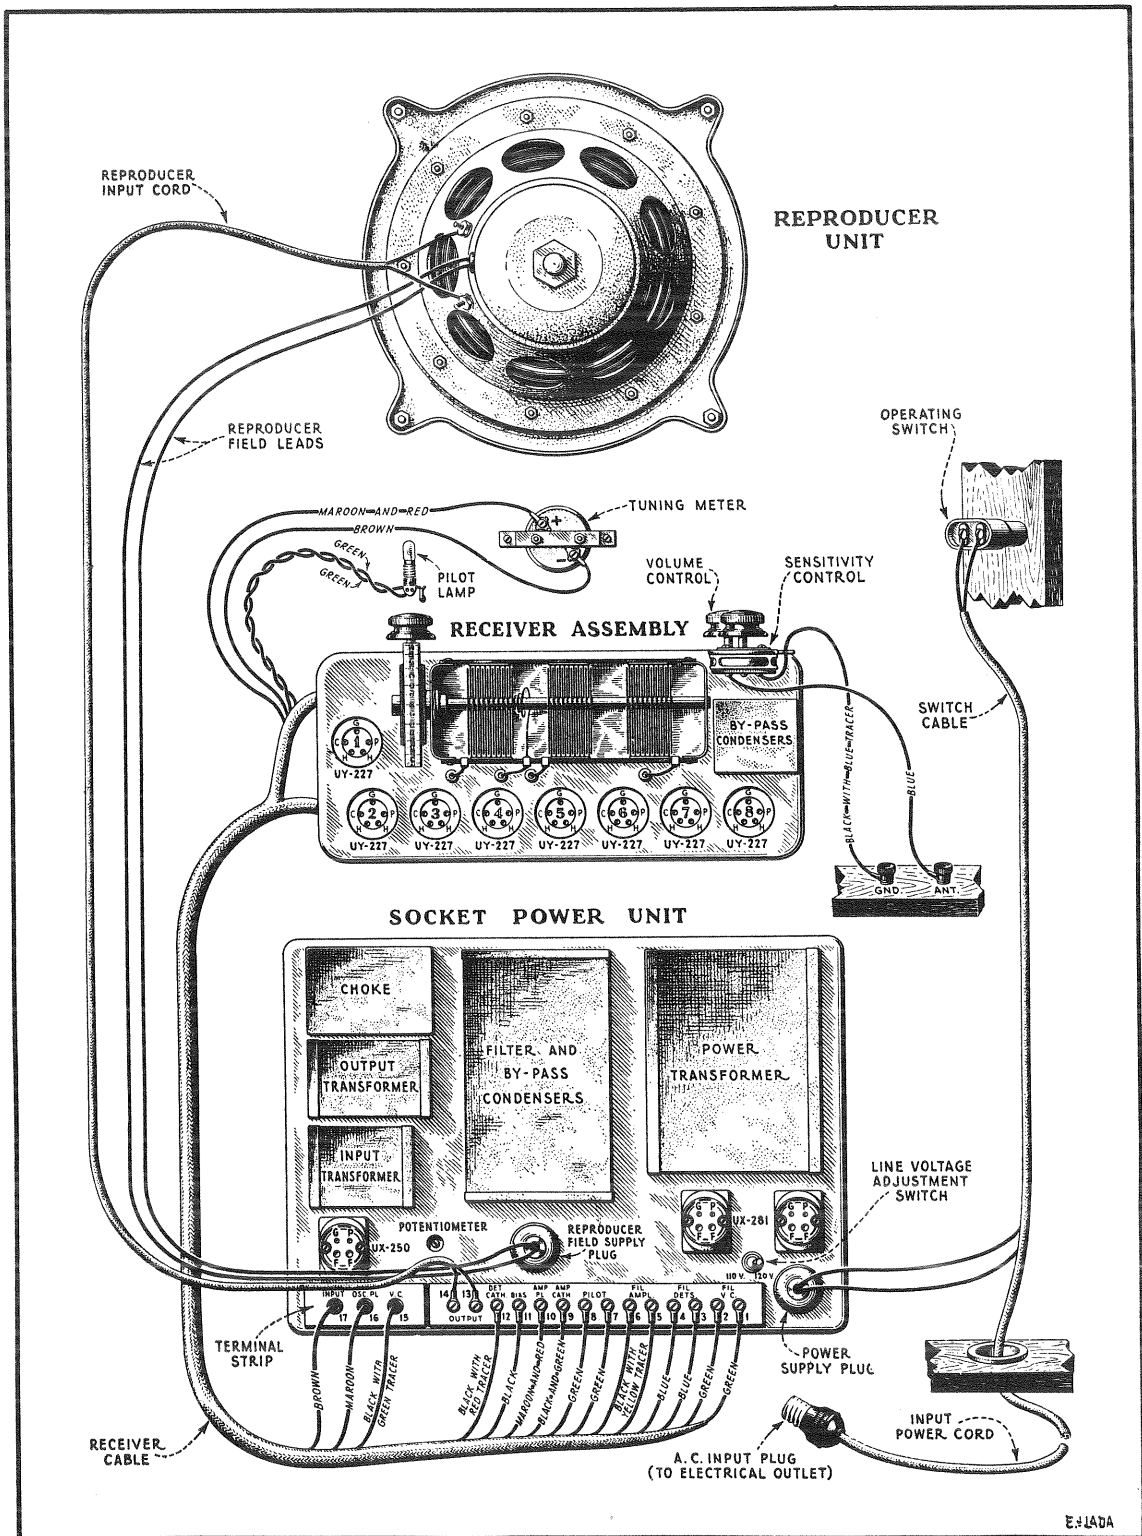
Reproducer, receiver and socket power units with connecting wires, terminal strip, lugs and Radiotron socket contacts
